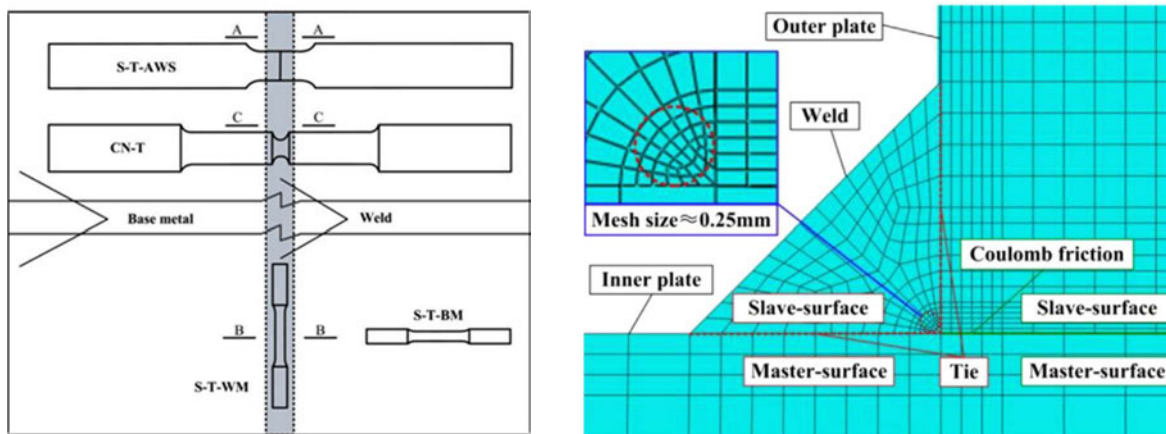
Tests of fracture in large-scale welded connections.
